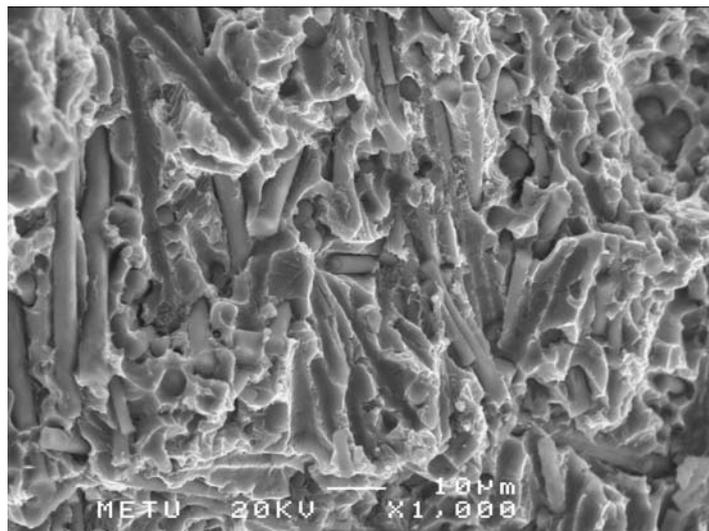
Fracture surface of AlSi7Mg0.8/20vol%Al₂O₃ reinforced composite squeeze cast at 750 °C
